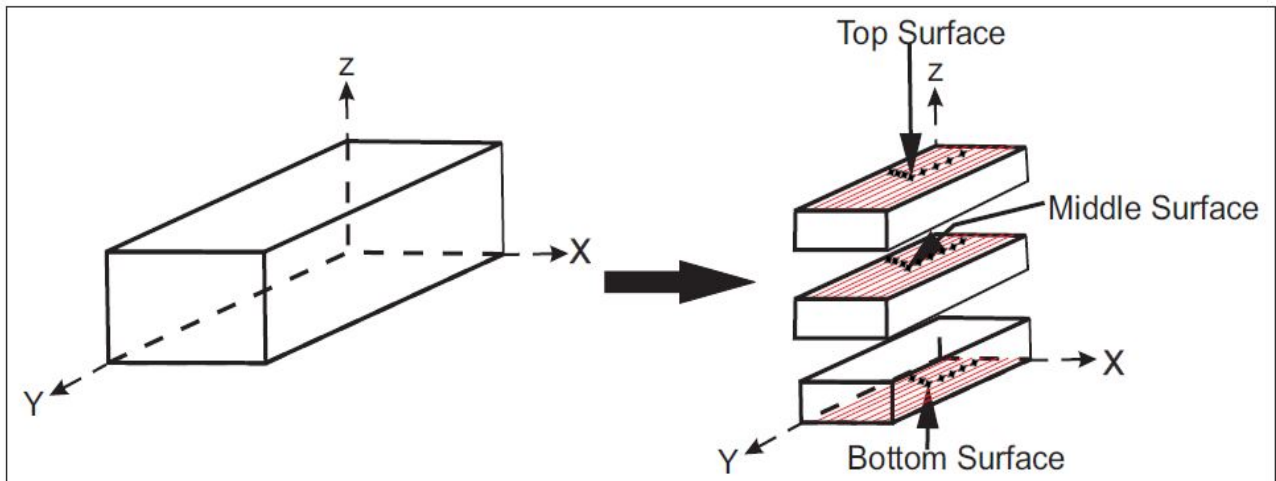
Auto-cad Inventor drawing of the tensile specimen bar.
